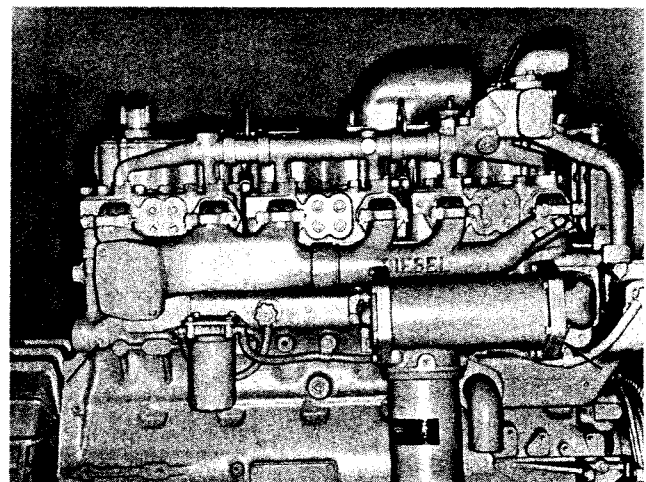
(N100126) 927 C.I.D. engine coolant drain points
